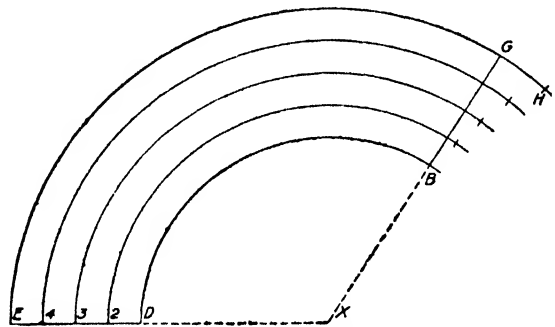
Pattern for Blank Using Radius Obtained in Fig. 82
